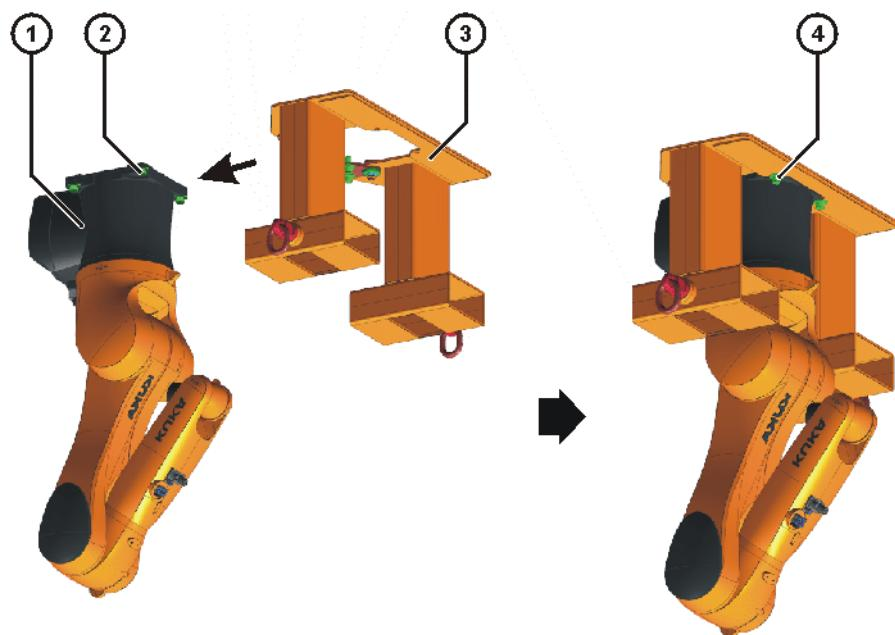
Fastening the Load Lifting Attachment to the robot
